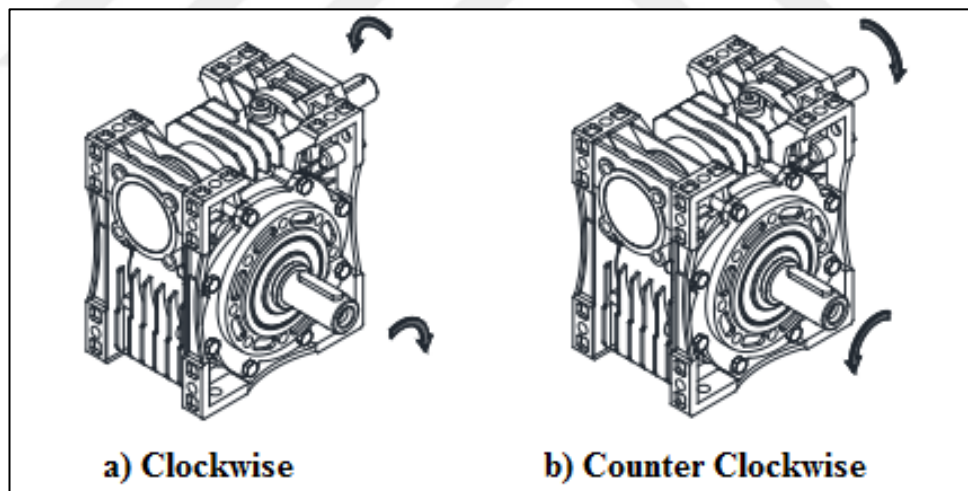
Perpendicular movement of worm gearbox (Yılmaz redüktör, n.d.)
